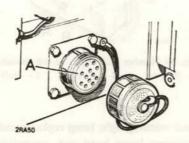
NATO trailer plug socket A—NATO trailer socket
